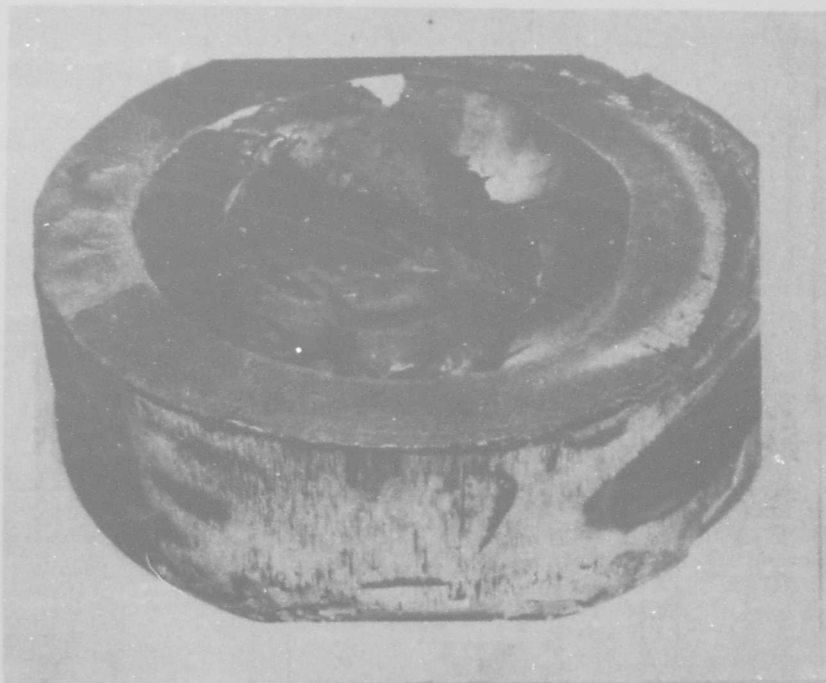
Collapsed 14-in. o. d. Hollow Cylinder, Baked and Hot-Pressed Without a Supporting Mandrel.
